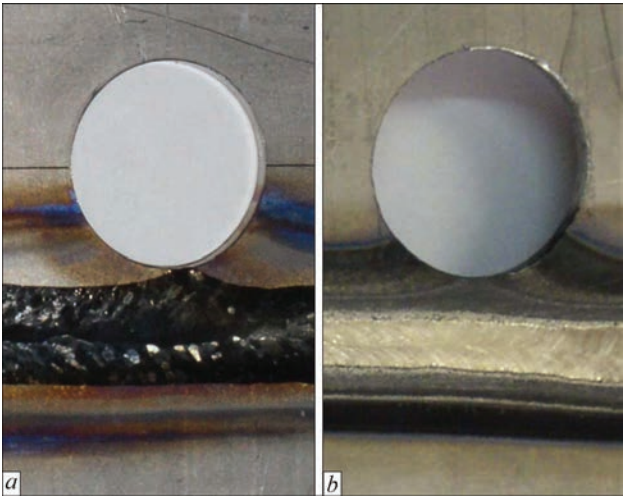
Appearance of fragments of welded specimens-imitators from VT-20 alloy of $\delta = 2$ mm thick at a full penetration: a — TIG welding, welding current is 100 A; b — A-TIG welding, welding current is 50 A
